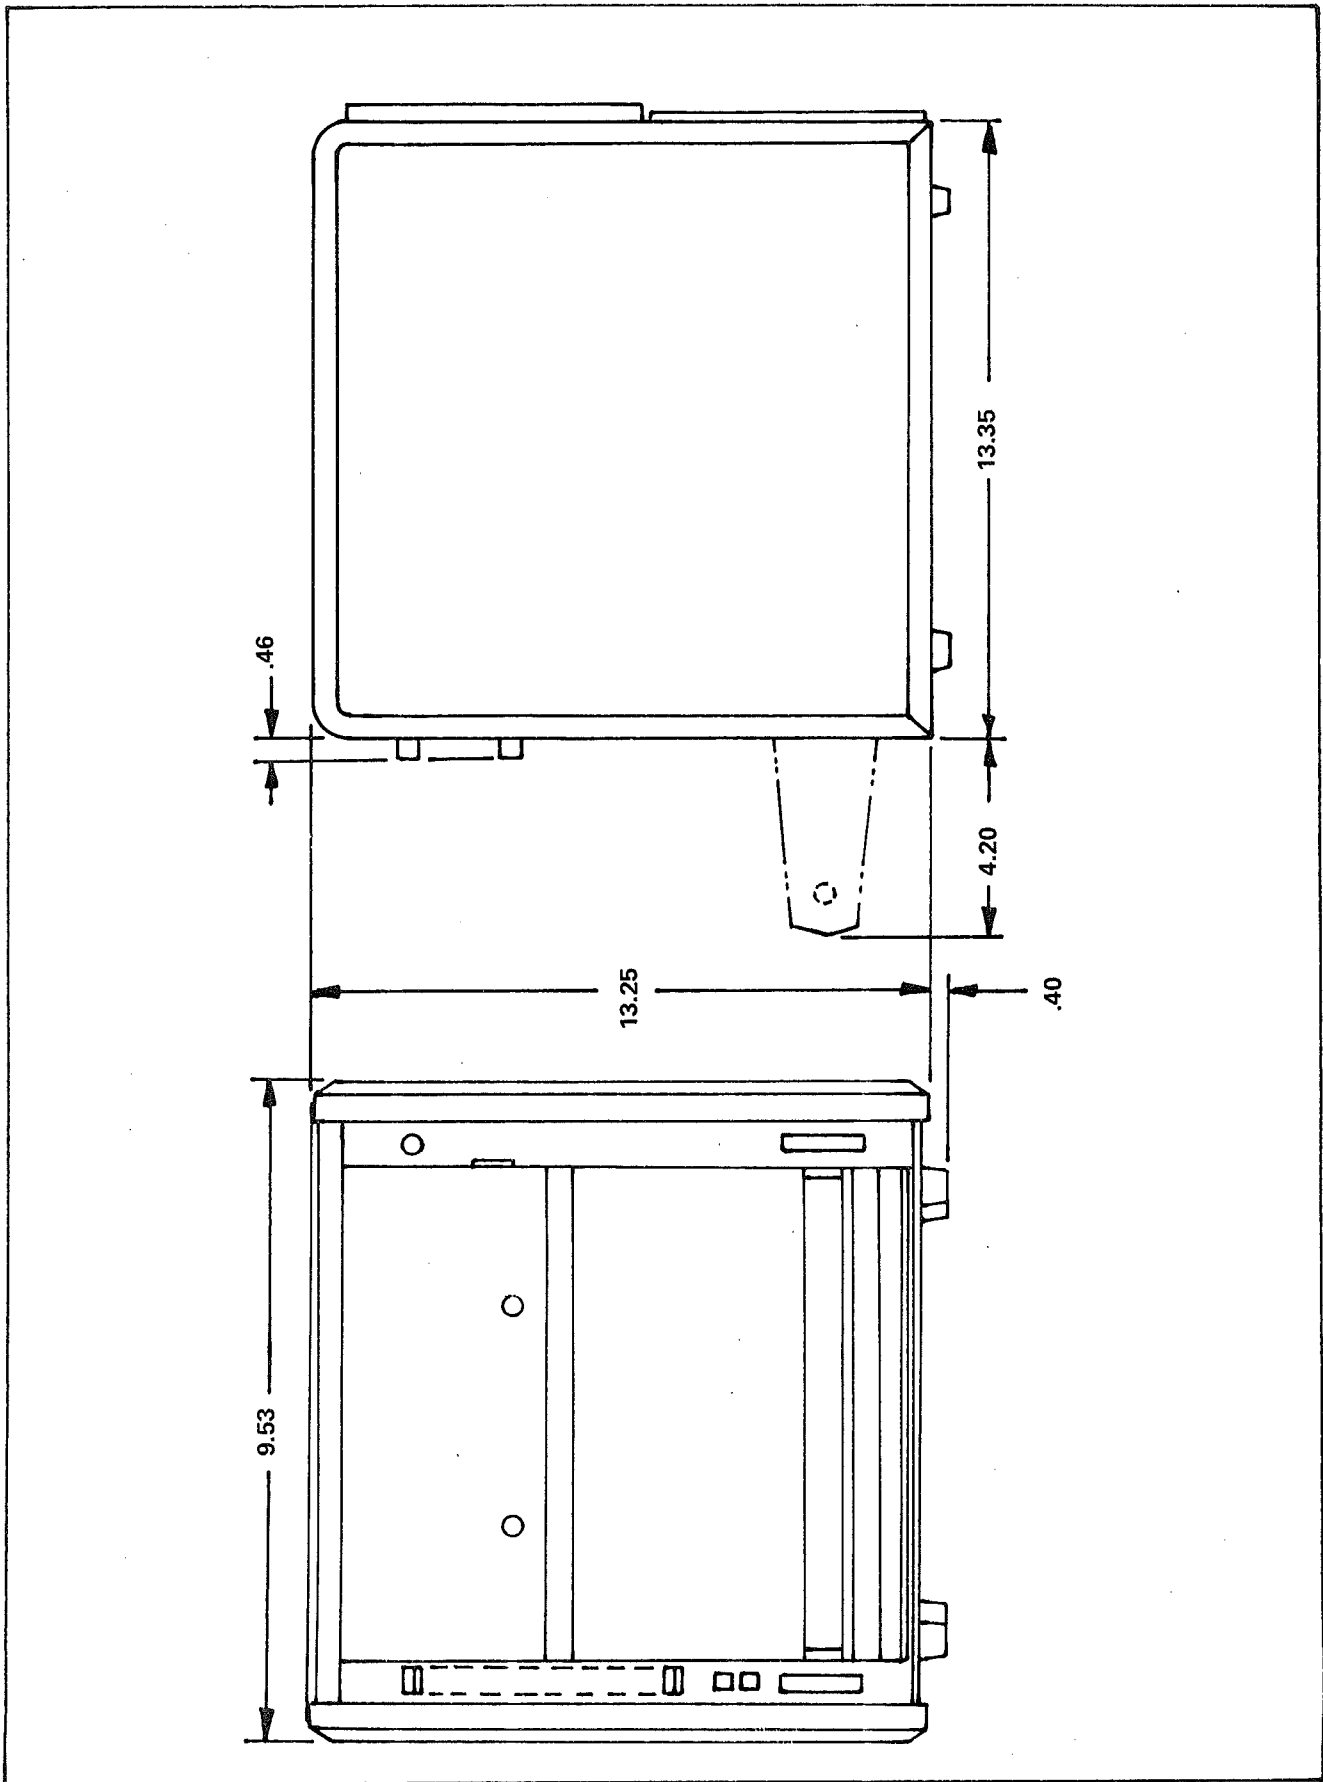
OUTLINE DIMENSIONS - 2200S PORTABLE RECORDER W/O PREAMPS
